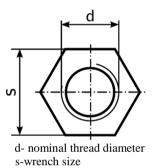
Hexagon of a Screw with wrench size "s" and nominal thread diameter "d" [12].
